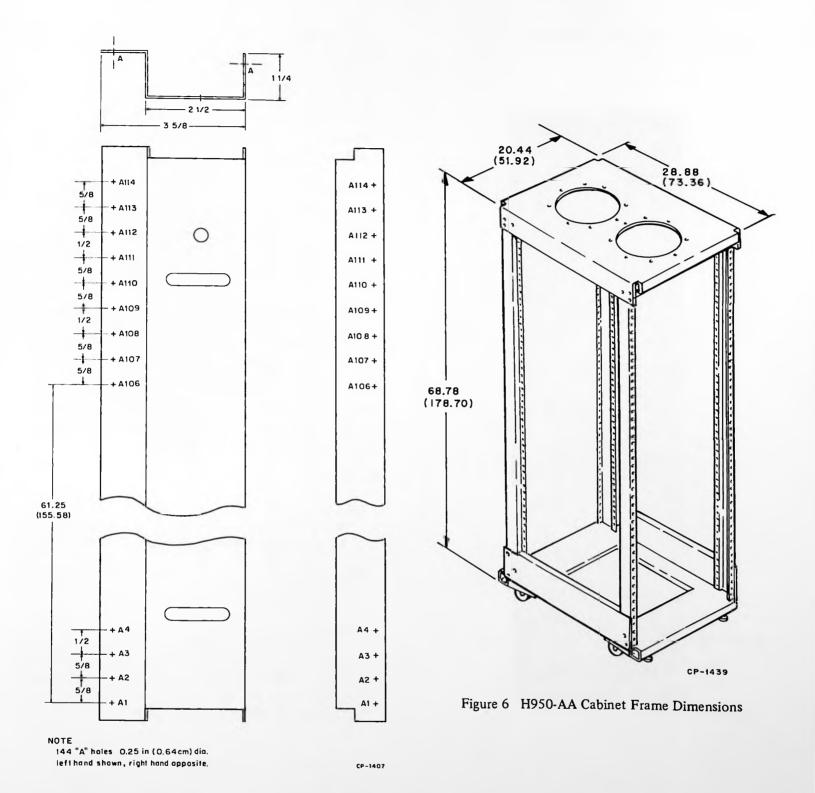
H950-AA Cabinet Frame Front and Rear Vertical Rail Mounting Hole Locations
